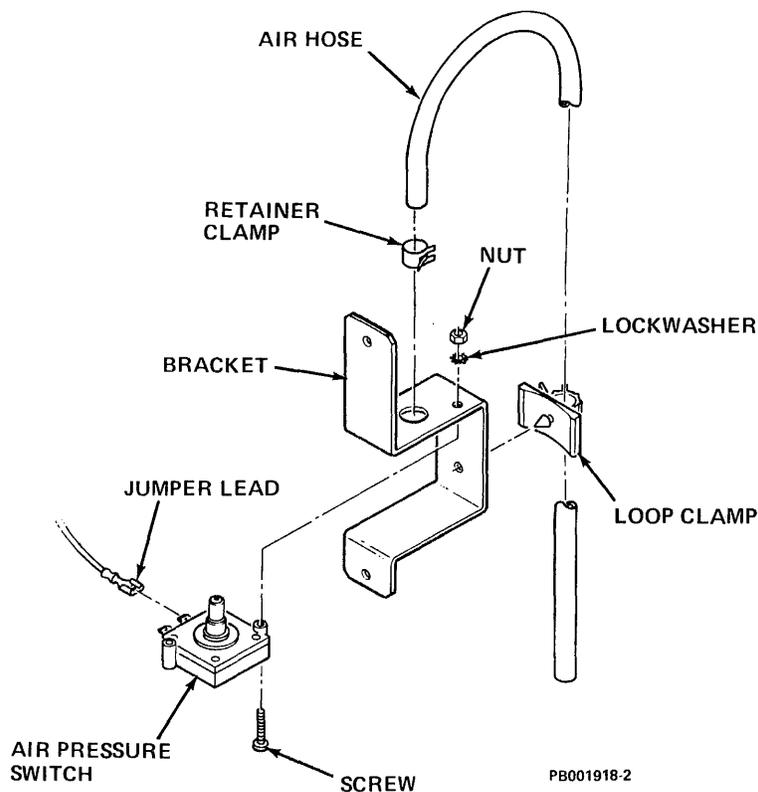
B Air Pressure Switch (Exploded View)
